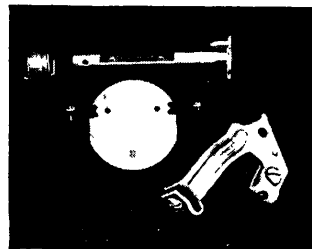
Assemble parts controlling choke circuit. Check for loose lever on shaft
